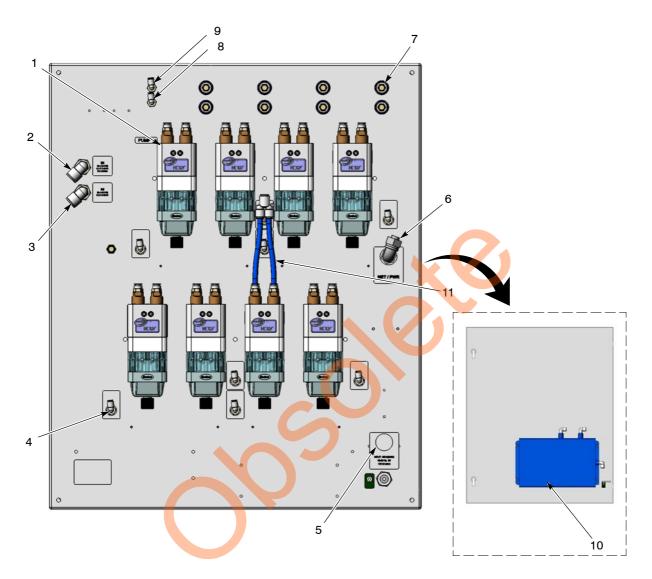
External Pump Panel Components (Eight-Pump Panel Shown)
